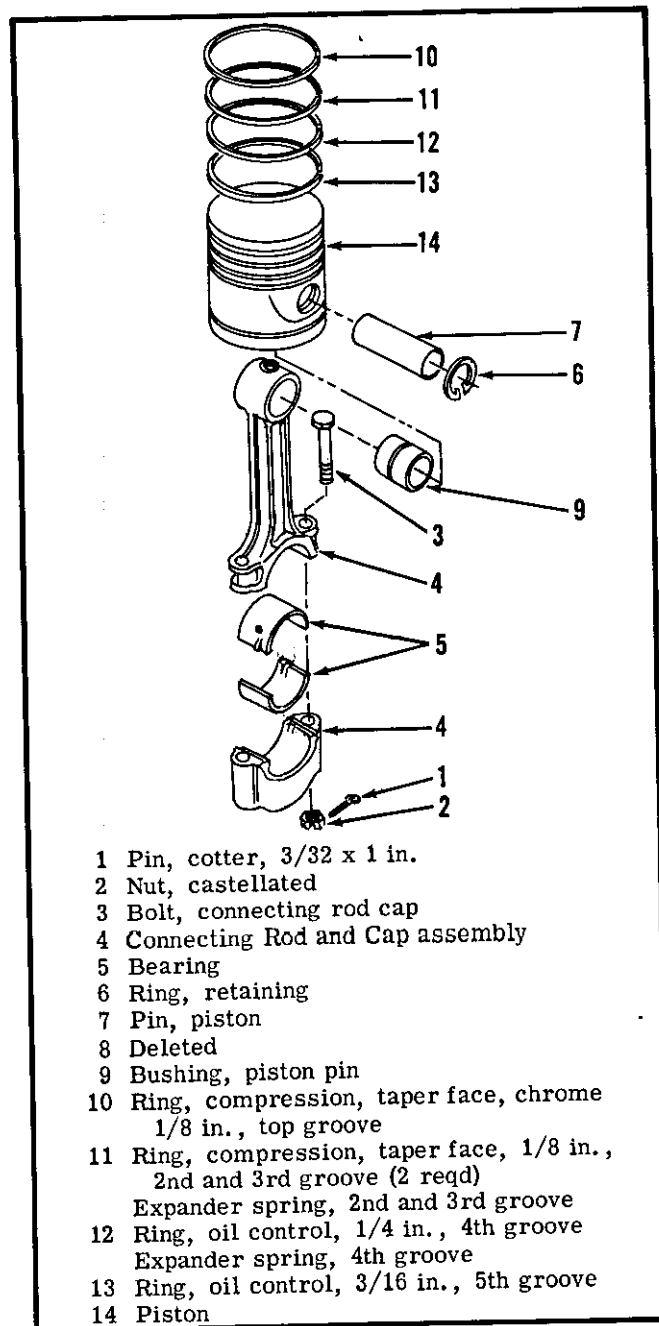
Piston and Connecting Rod Assemblies, Disassembly and Reassembly
